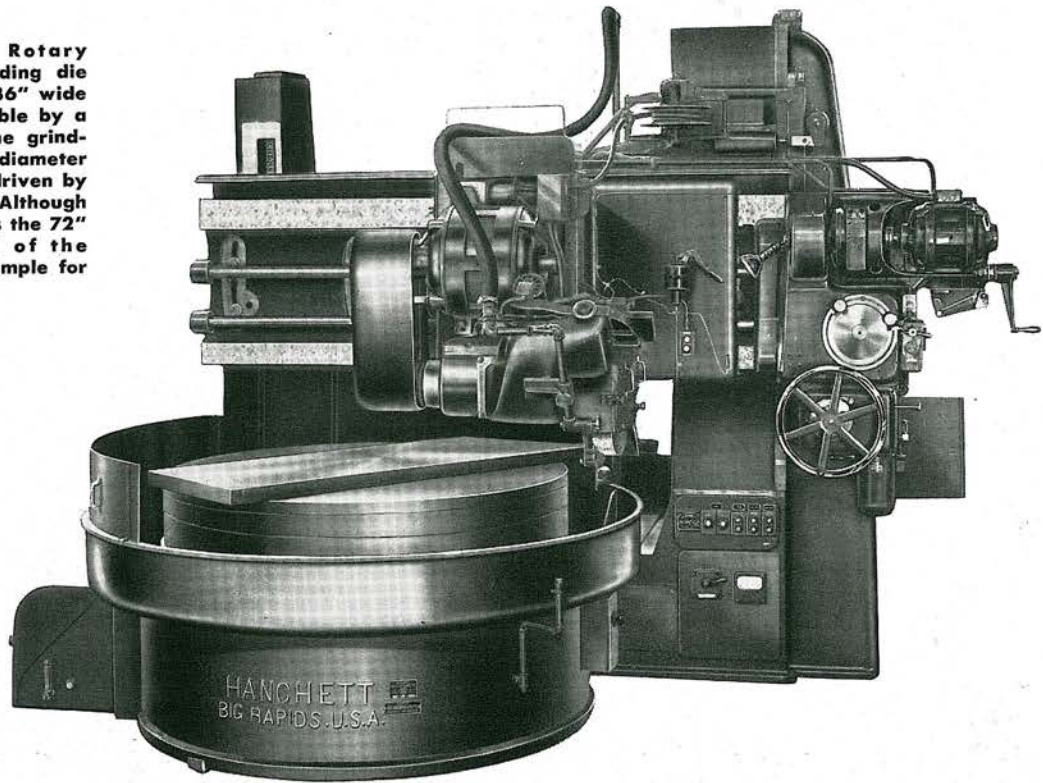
Front view of Grinder with head approximately centered on the cross-rail.
